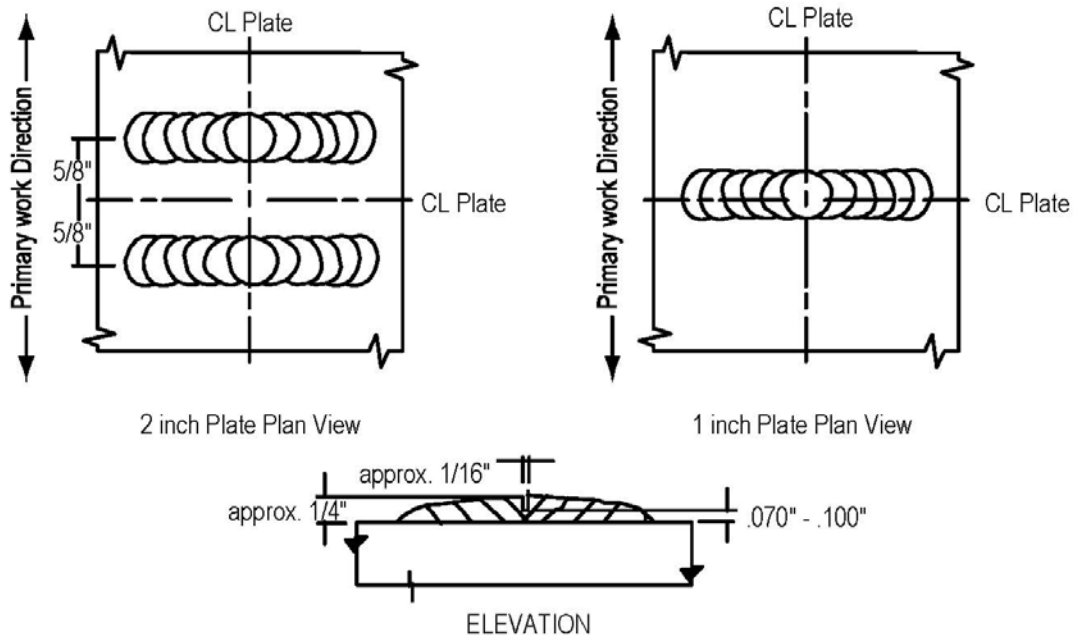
Crack Starter Bead Configuration – Base Metal Evaluation Without a Weld Joint.
